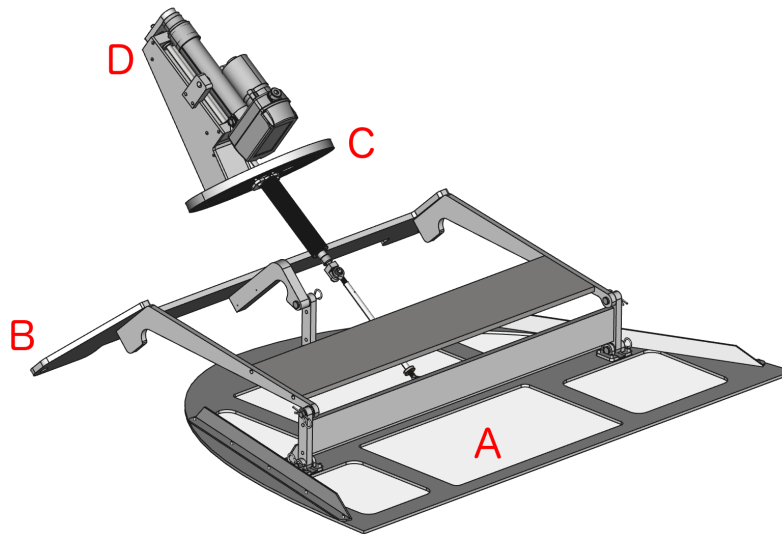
A CAD drawing of the large cleaner assembly and actuator. The small cleaner has a similar assembly. A: the cleaner that is used to remove high-energy UCN from the trap. B: the mounting bracket that attaches to the vacuum jacket and supports the cleaner assembly. C: vacuum port with a feedthrough that connects the cleaner to a stepper motor. D: The stepper motor that is used to raise and lower the large cleaner.
